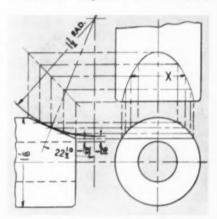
Construction layout of the angularly milled clamp is provided in this sketch.
